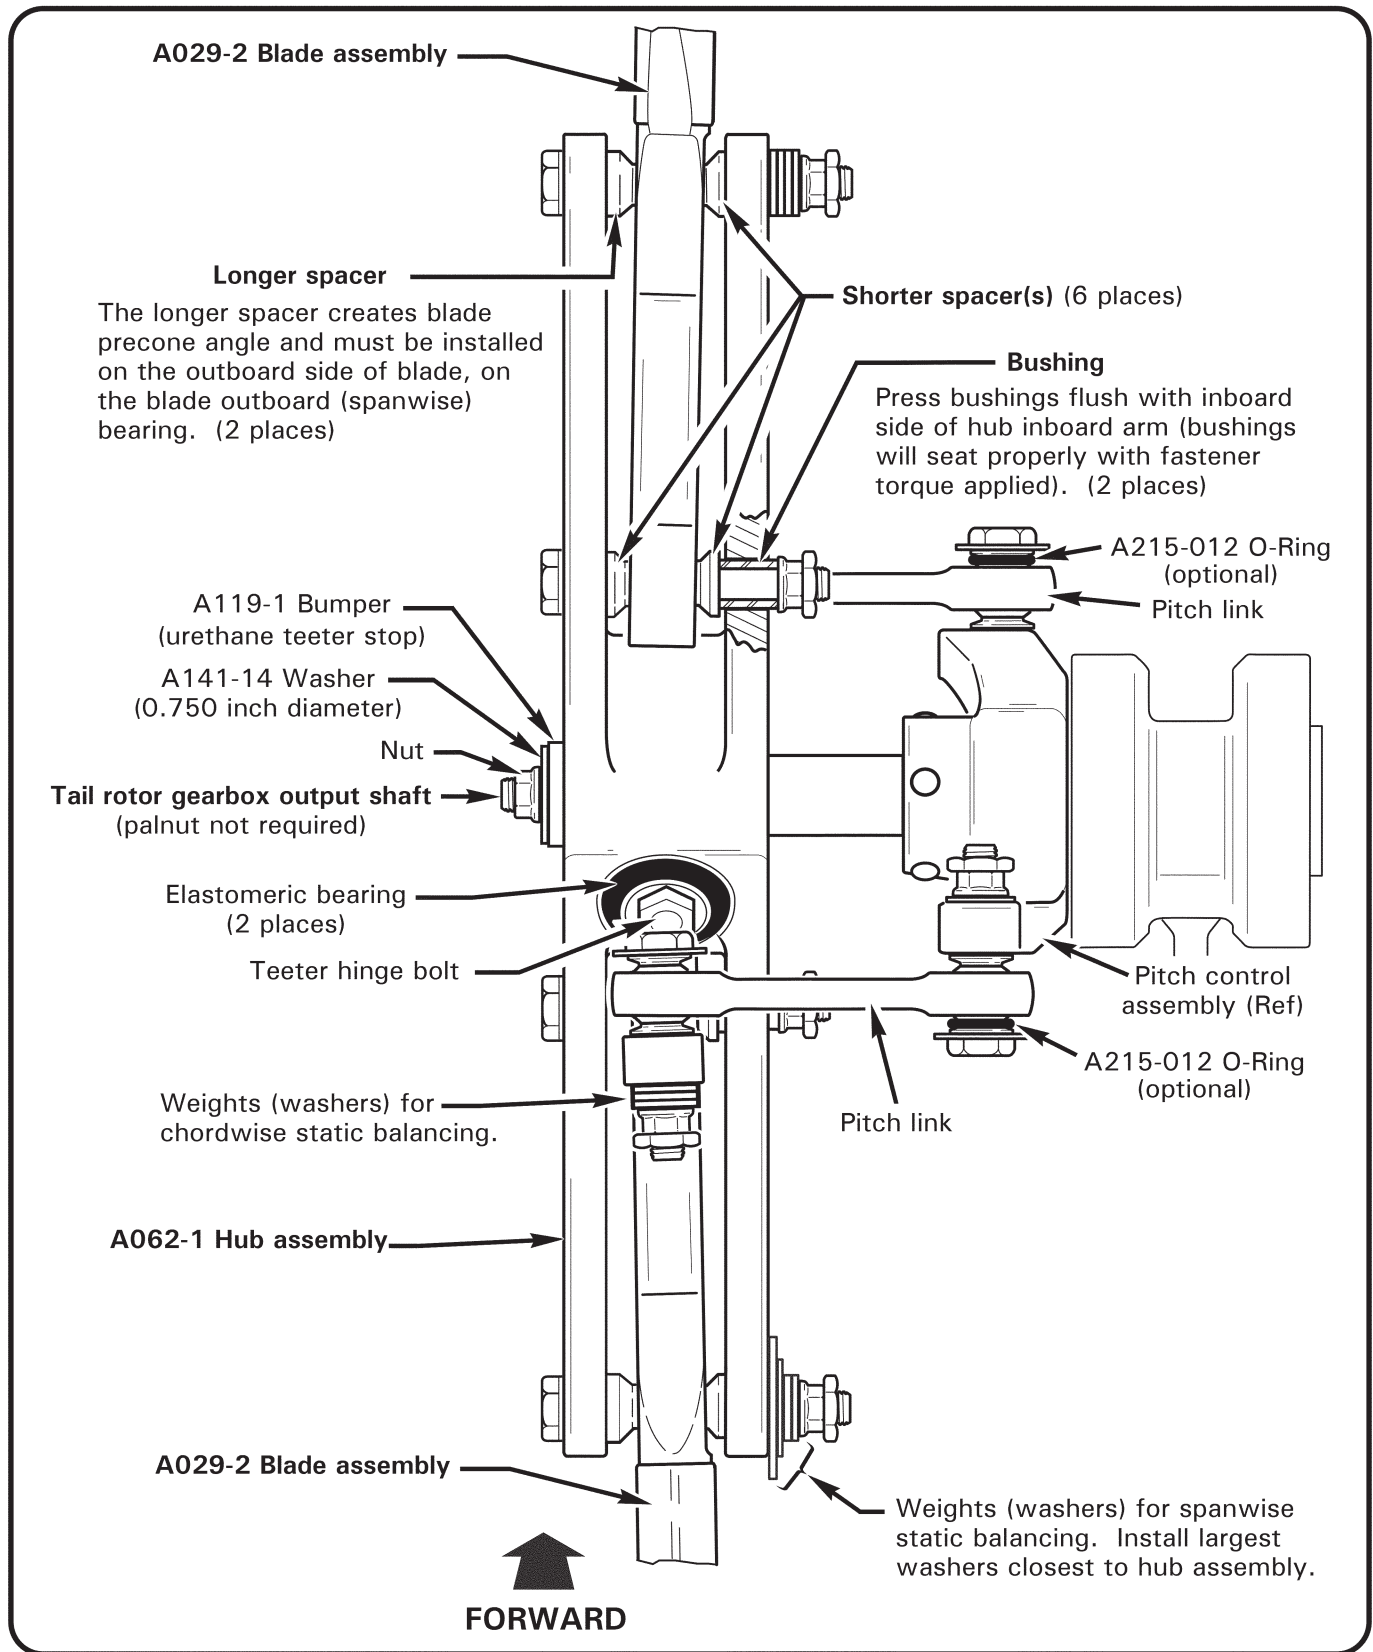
TAIL ROTOR ASSEMBLY INSTALLATION
